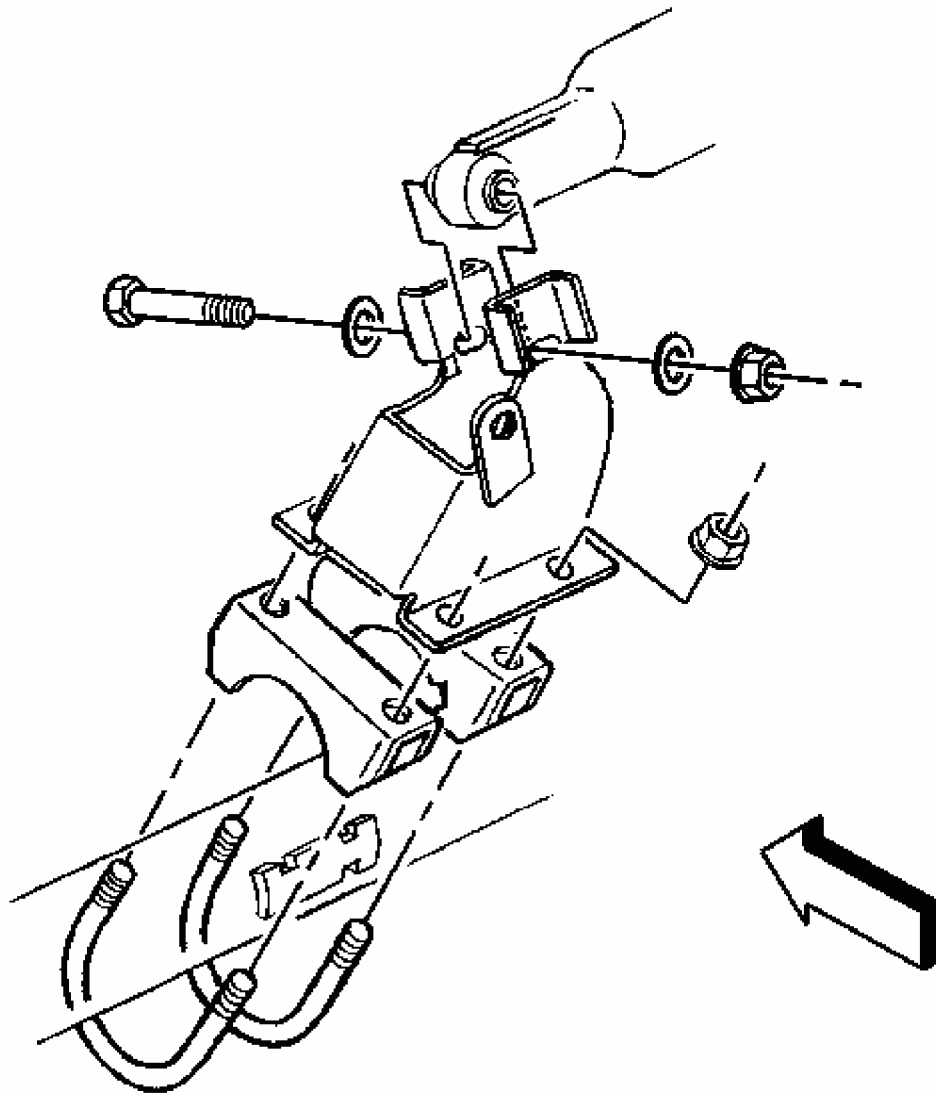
View Of Rear Tie Rod Mounting Frame Bracket
